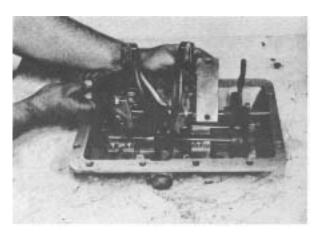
Position front rail support shift rails and install capscrews. Position rear support over rails and install capscrews.
